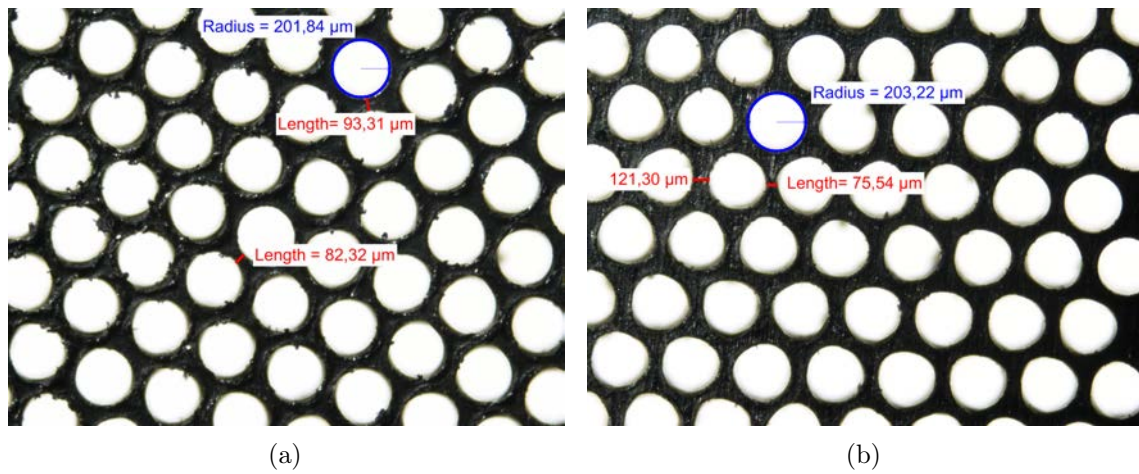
Upper (a) and lower (b) face of a drilled converter produced at the CERN workshop. The prototype was drilled in an equilaterally triangular geometry with $400\ \mu\text{m}$ hole diameters. Some measured hole-to-hole separations and hole diameters are indicated.
